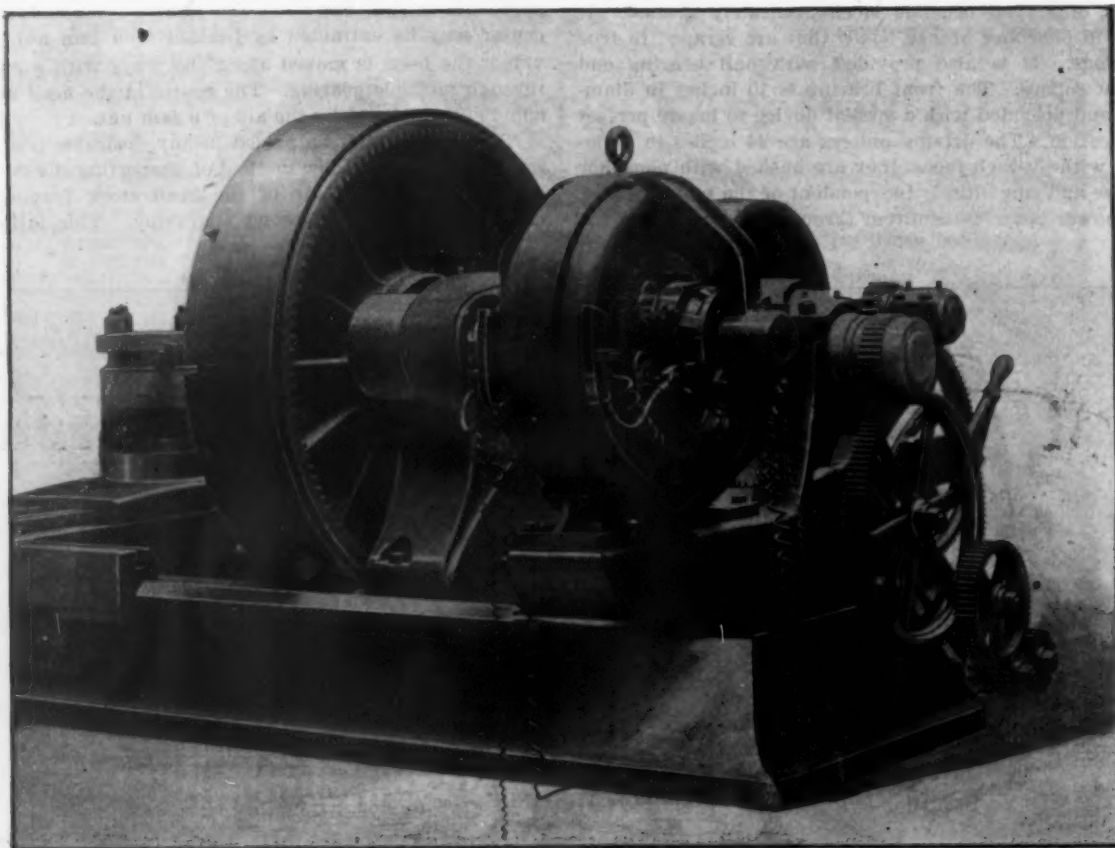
Rear View of Head Stock, Showing Position of Motor.
